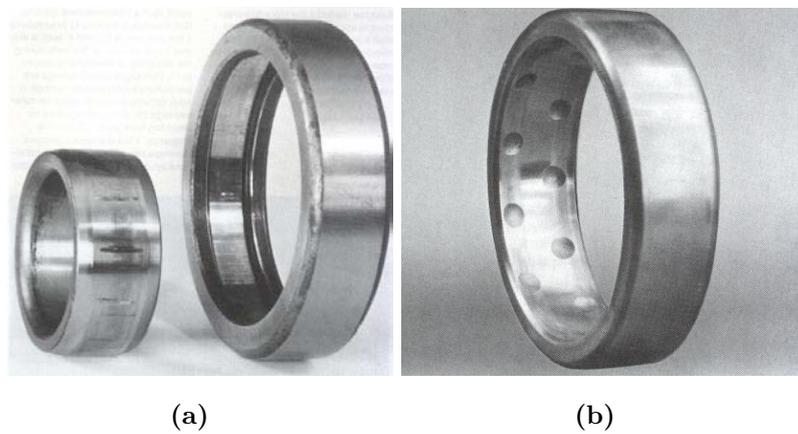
Bearings damaged by external vibration (a) fluting of outer and inner ring of a spherical roller bearing (b) outer ring of a self aligning ball bearing showing spherical cavities [50].
